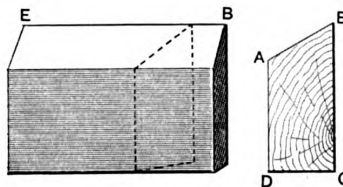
Side and End Views of Blank from which to Cut the Molds.
